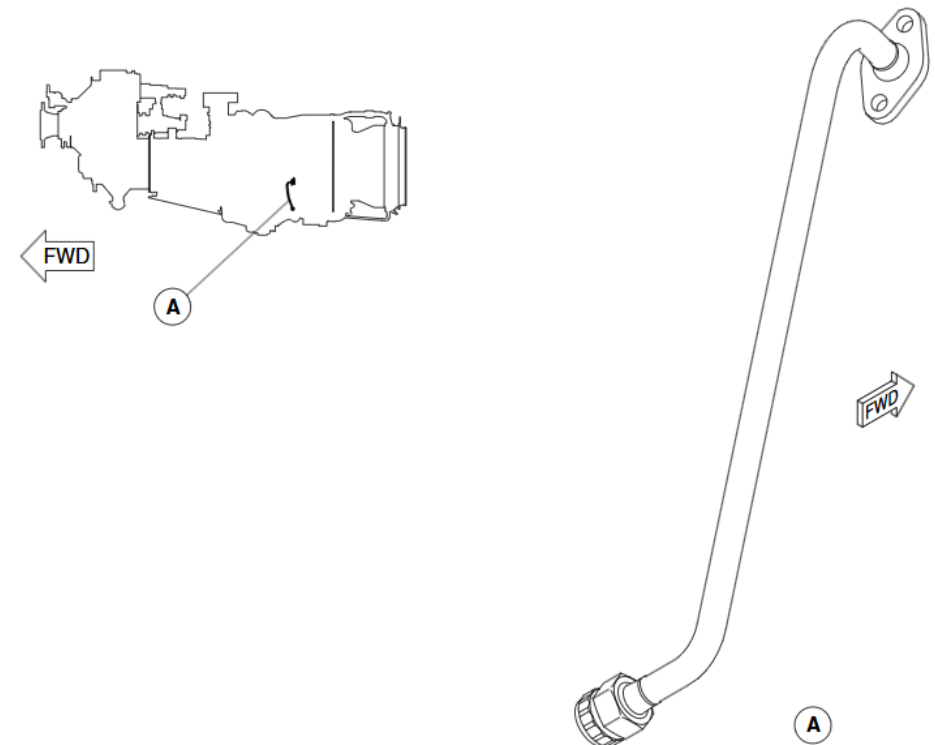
Gas Generator Case to P3 Separator Air Tube
